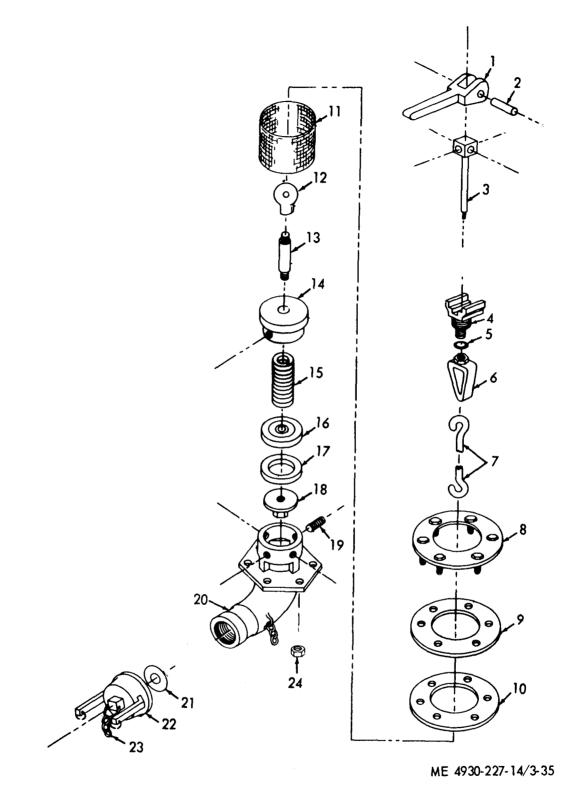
Discharge valve assembly, disassembly and reassembly.
